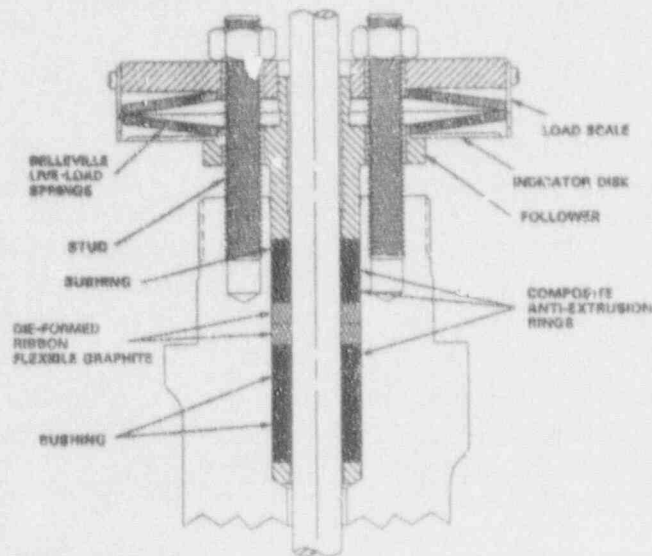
Sketch of Fisher Control live-loading applied between gland follower and gland plate.
